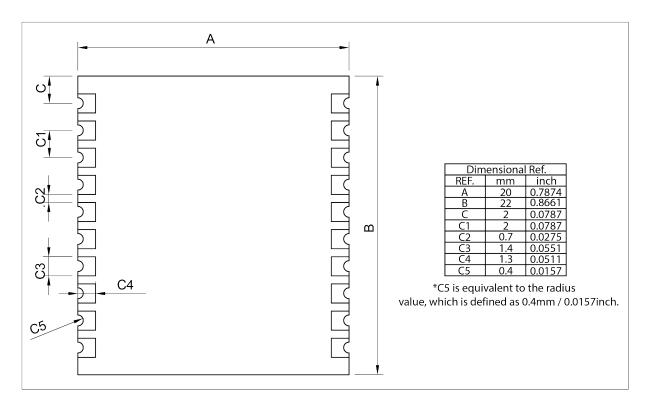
SM5211-SMD Bottom View (SMD20 Package)
